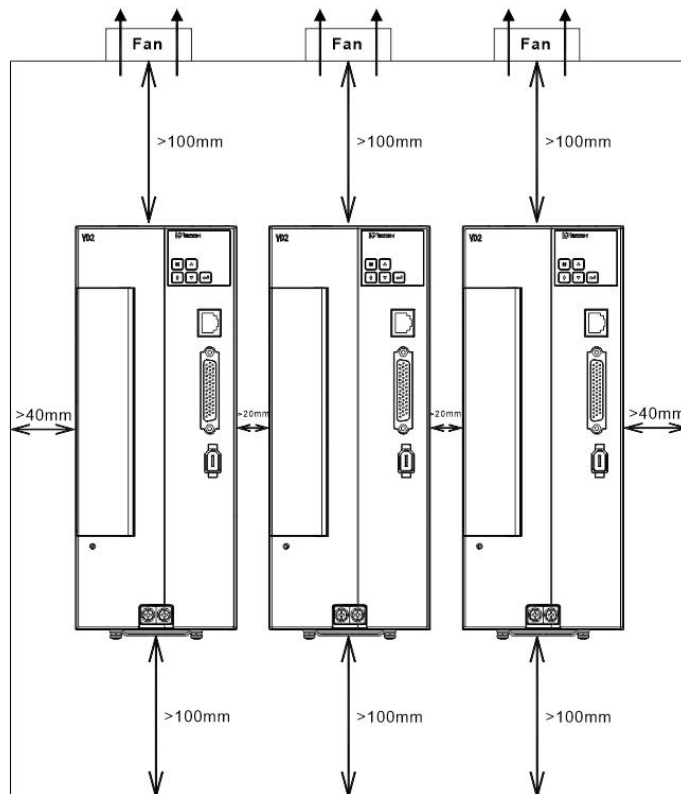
Parallel installation dimensions of multiple VD2C drives
